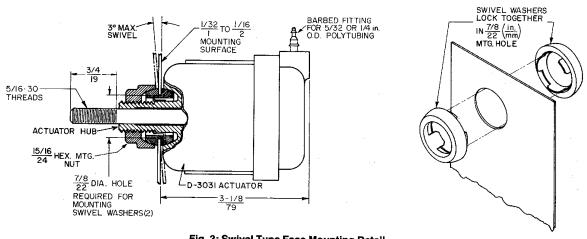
Swivel Type Face Mounting Detail Dimensions $\frac{\text{in.}}{\text{mm}}$
